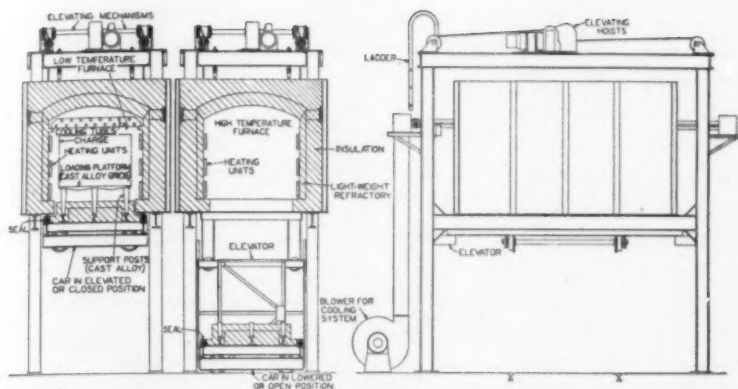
TYPICAL LAYOUT OF TWO, ELEVATOR-TYPE, ELECTRIC MALLEABLE ANNEALING FURNACES.
